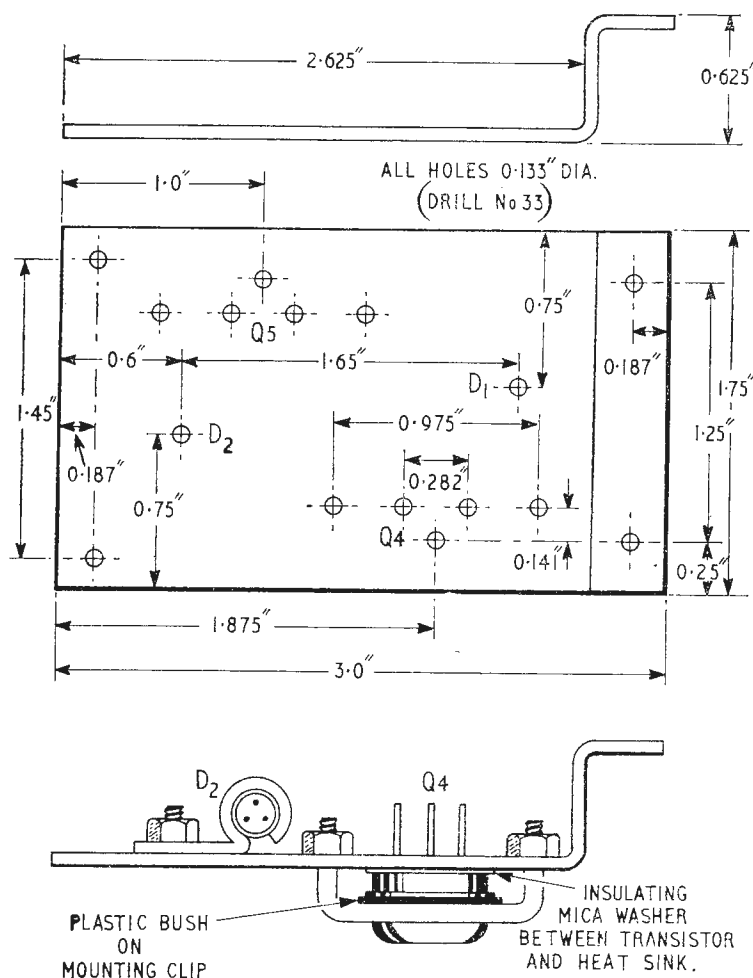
Details of heat sink assembly of 3W amplifier. (a) Heat sink (b) Diode and transistor mounting.
